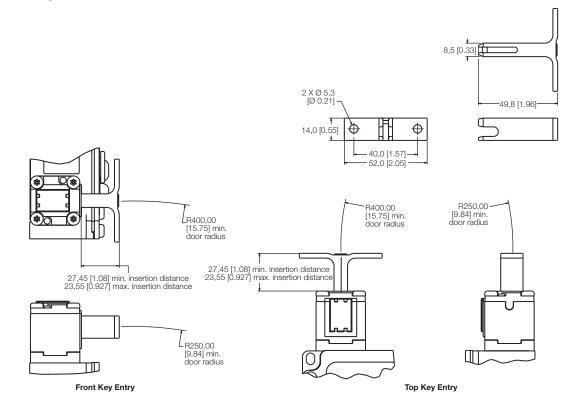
GKL/R Key Code 8 Dimensions mm [in]
